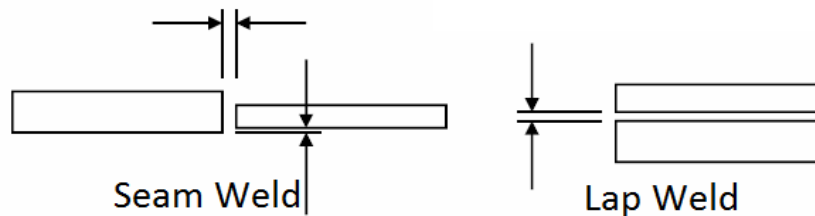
J-11: Fit-up requirements for butt joint and lap joint configurations in laser welding^{T-9}
